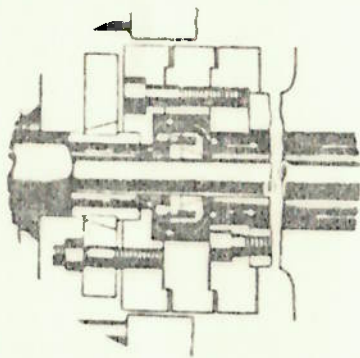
Filler flange is used when journal diameter is less than 2 1/2".
